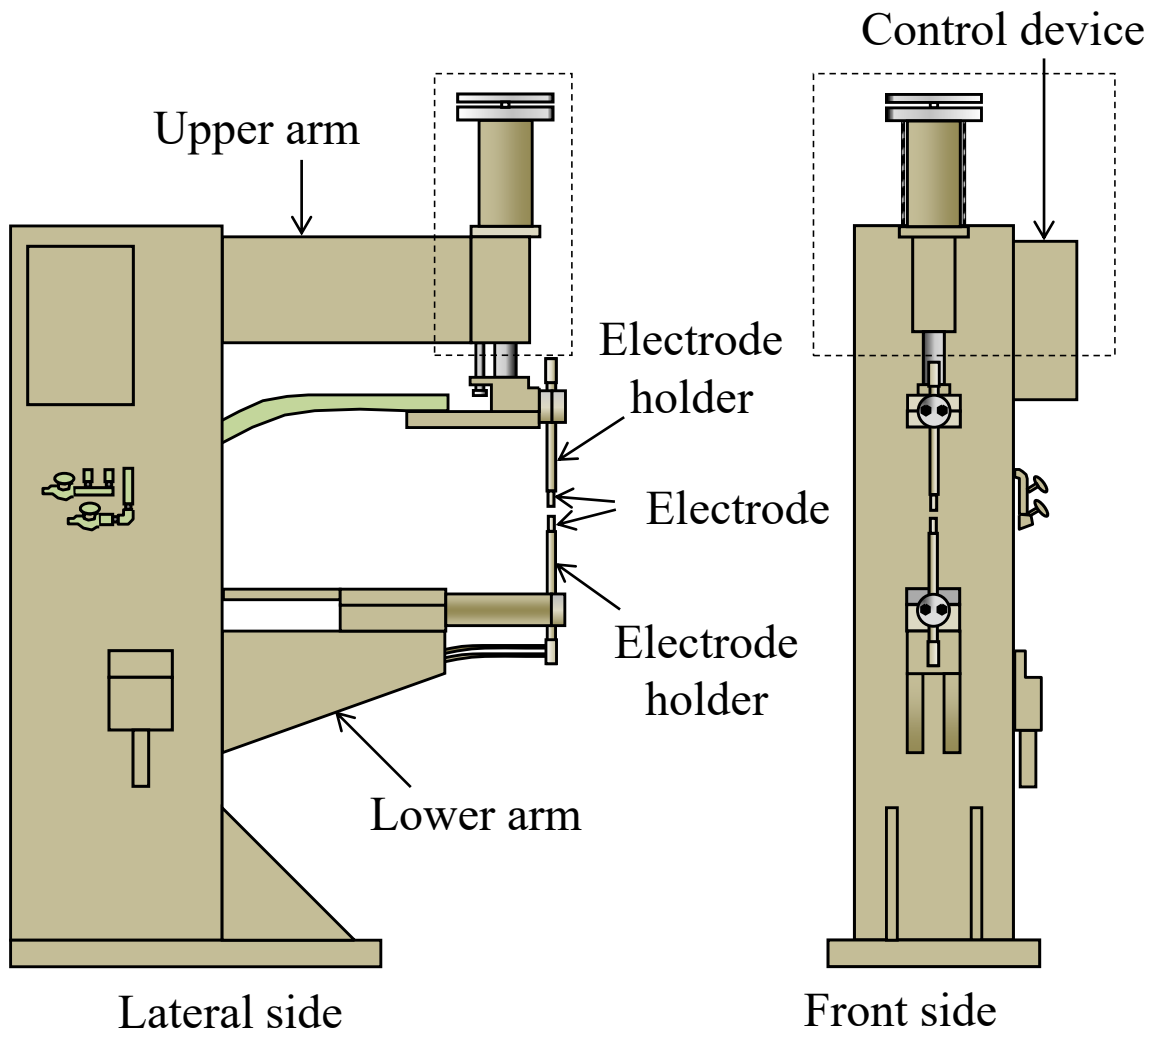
Schematic diagram of resistance welding machine.
